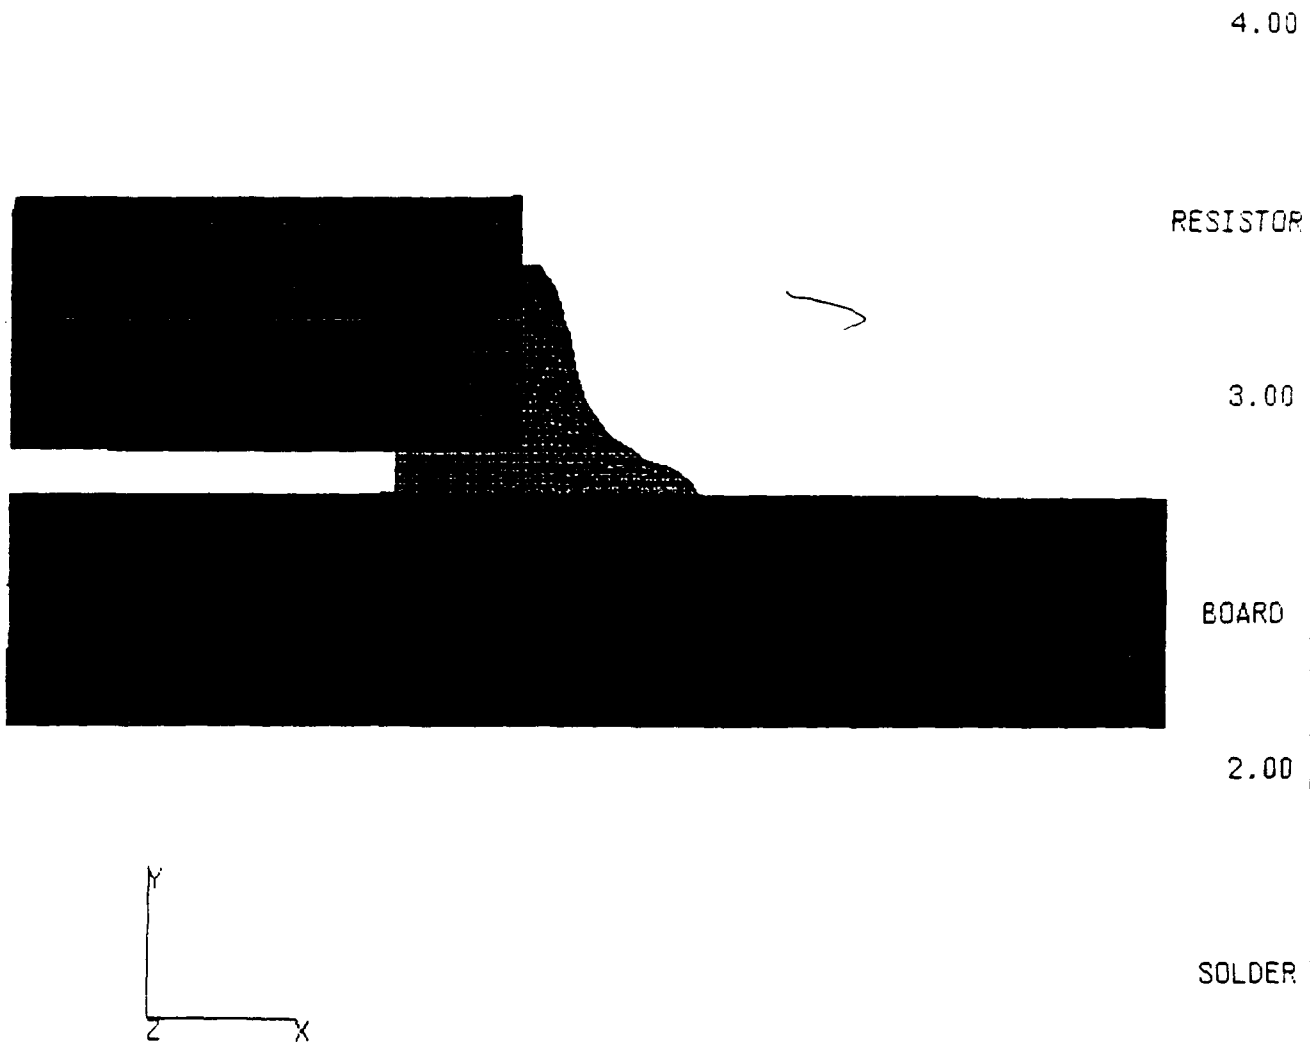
Two dimensional solid model of solder-resistor-board assembly
